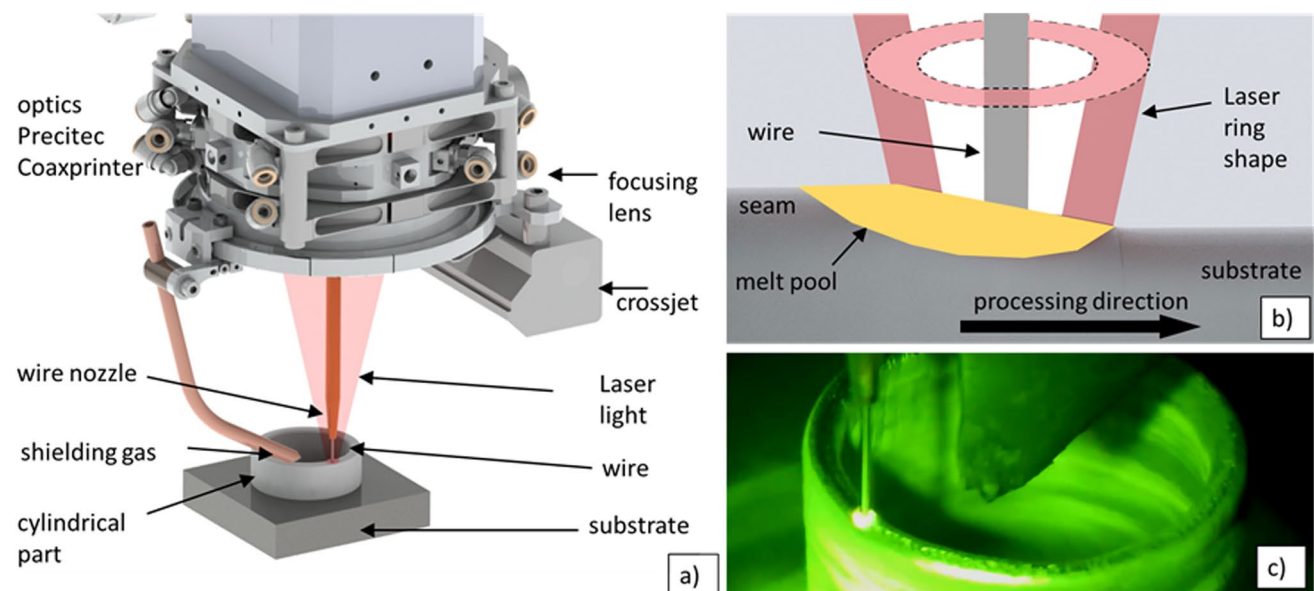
LMWD-process: a processing head; b laser ring shape and wire; c deposition process [21]
